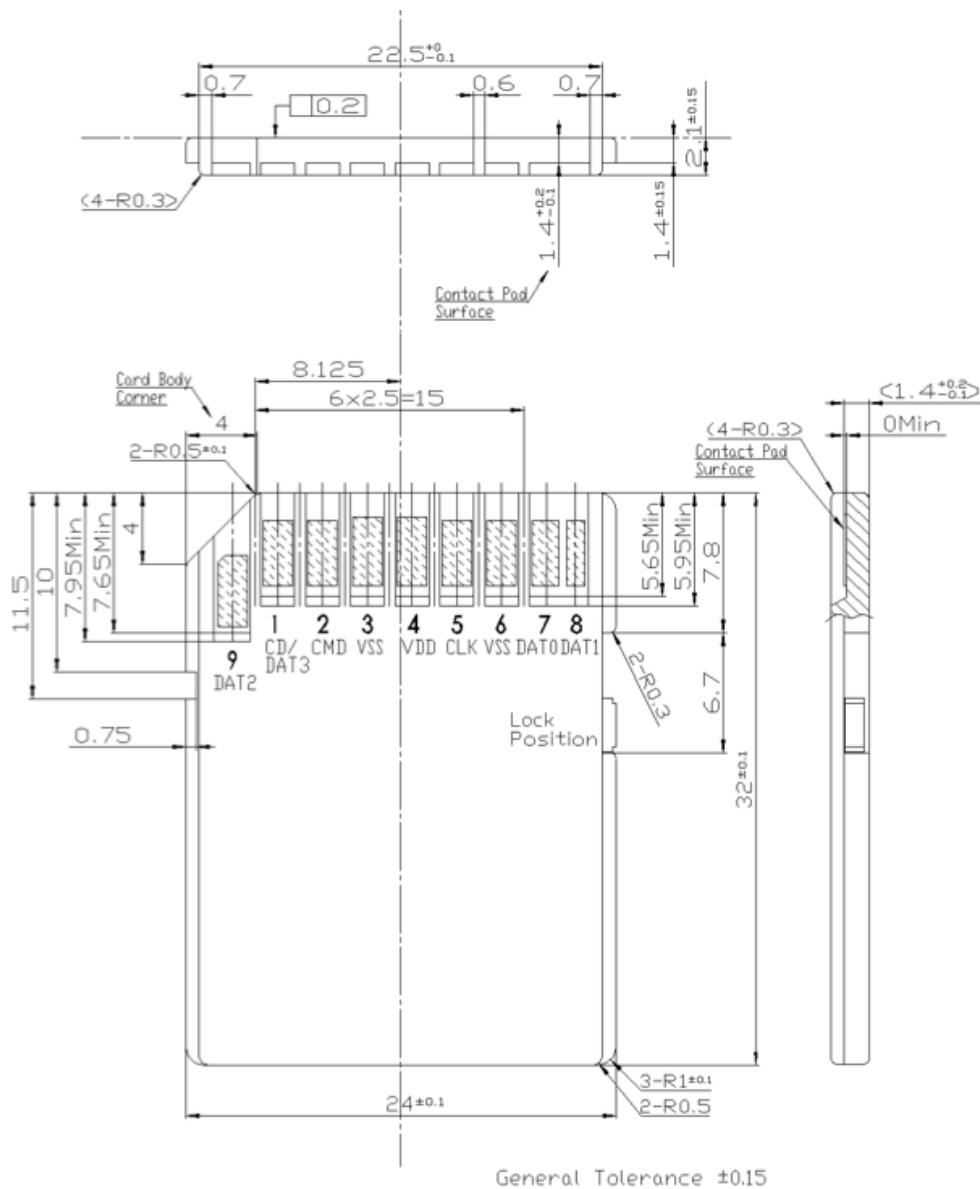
InnoDisk Industrial SD Card mechanical dimensions
